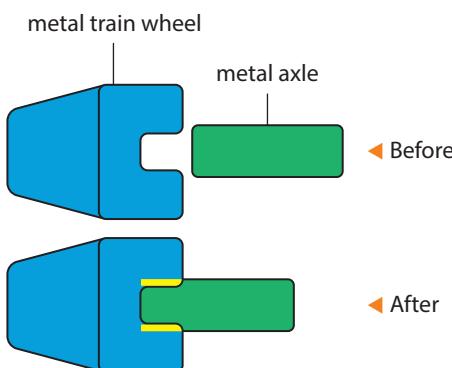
Shrink fitting two metal parts together using thermal expansion
